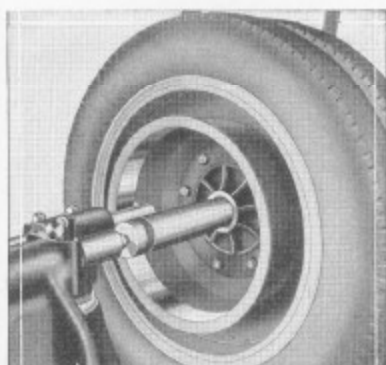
Truing Brake Drum of a Rear Dual Truck Wheel Using Extra Long Tool.
